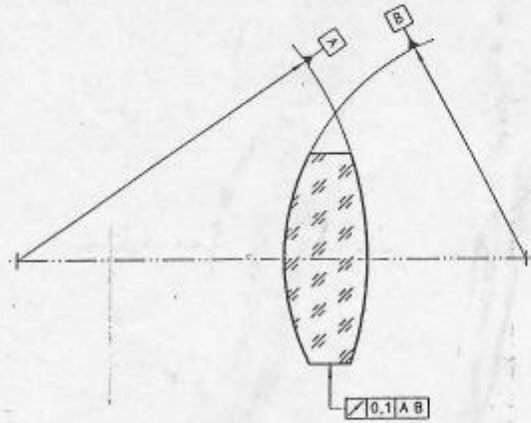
Centring tolerance indication of a surface without optical function
